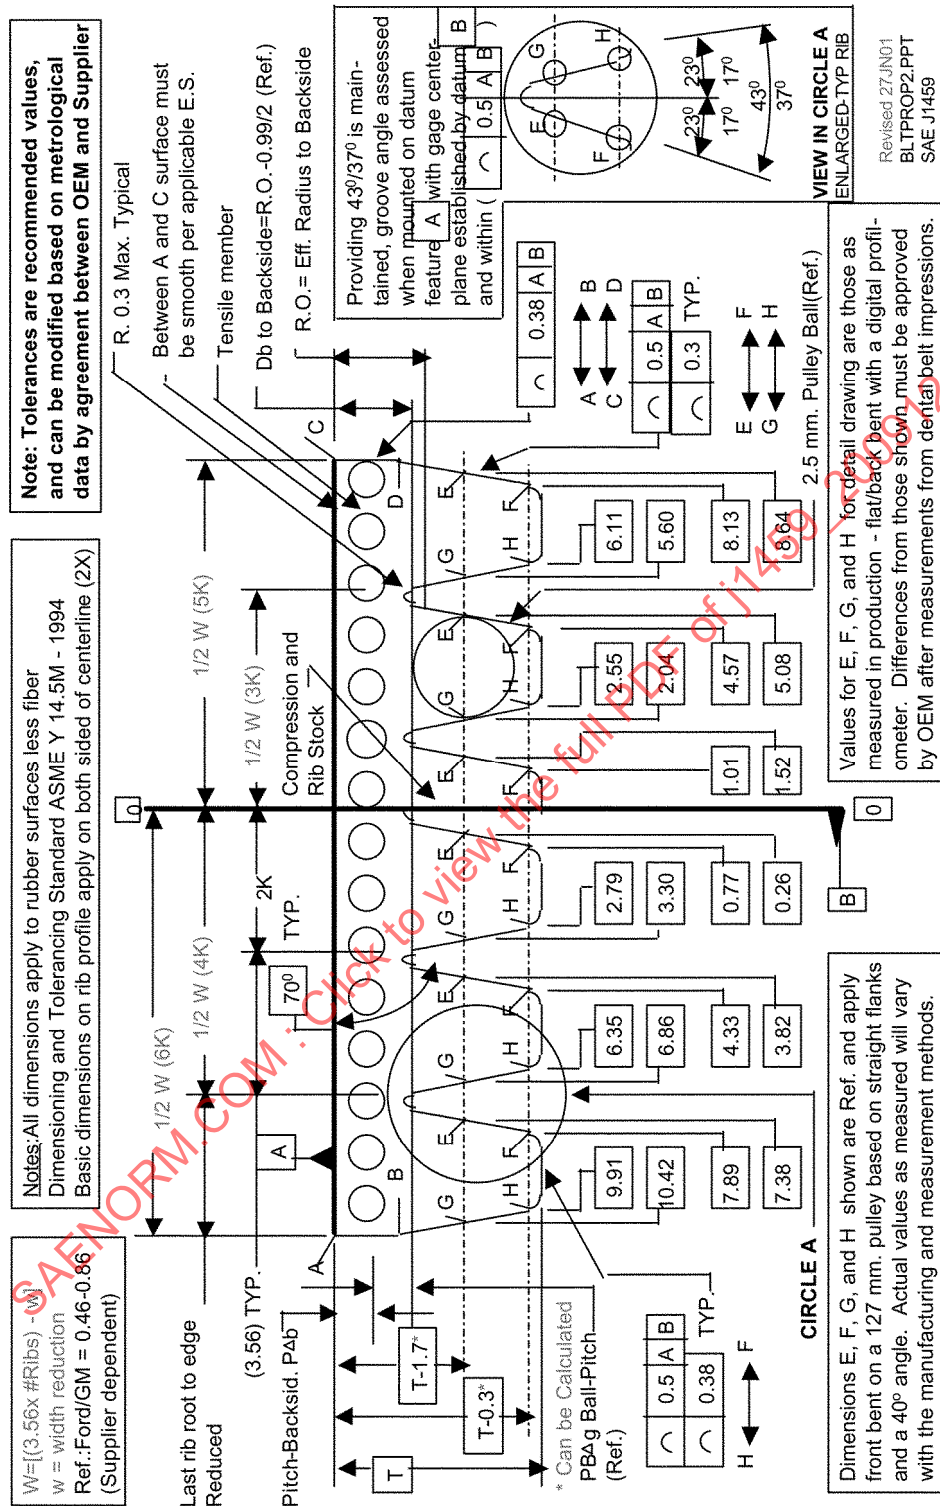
BELT DIMENSIONING TEMPLATE
